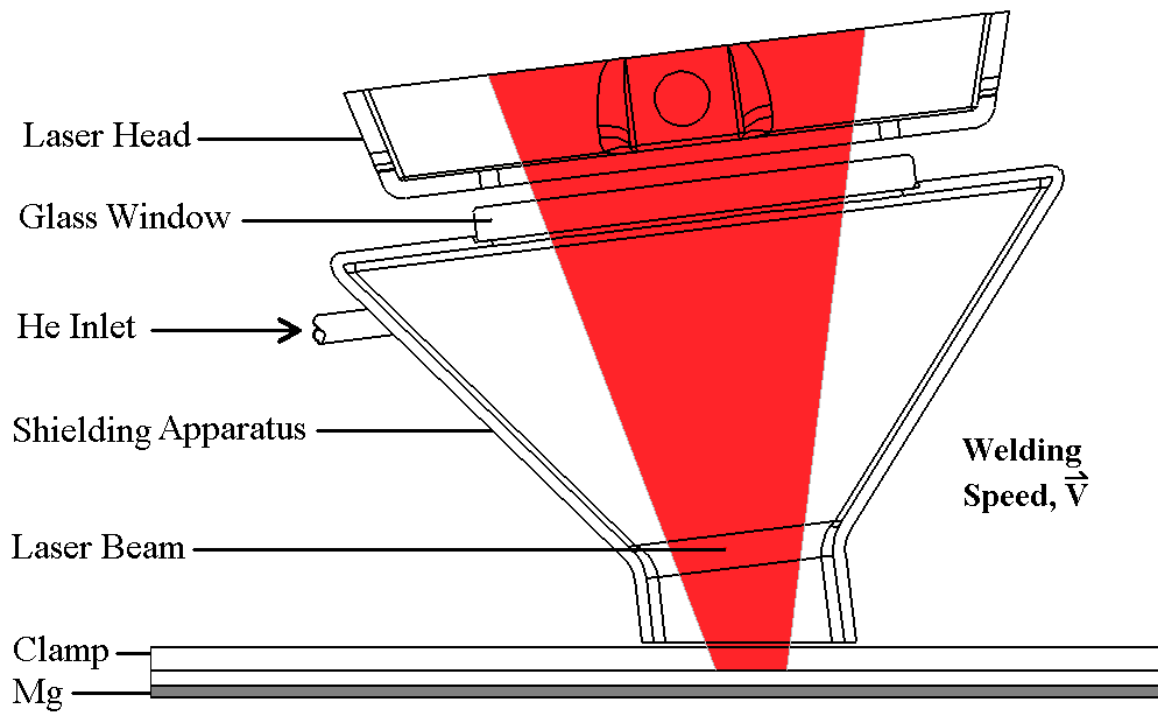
Diode laser head co-axial shielding gas apparatus.
